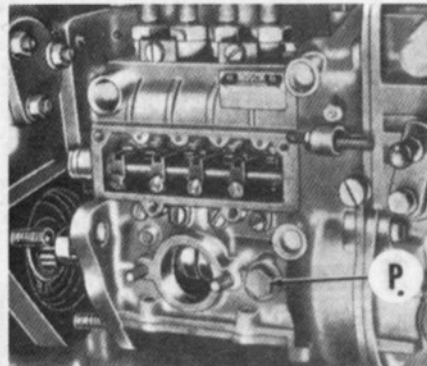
A—View of Bosch injection pump used on Models 834 and L54 showing location of drain plug (P).
